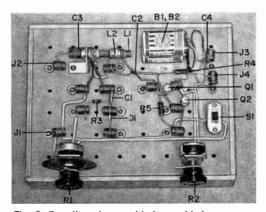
Breadboard assembly is provided as component layout guide; if you prefer, you can assemble your project in a substantially smaller volume space.
